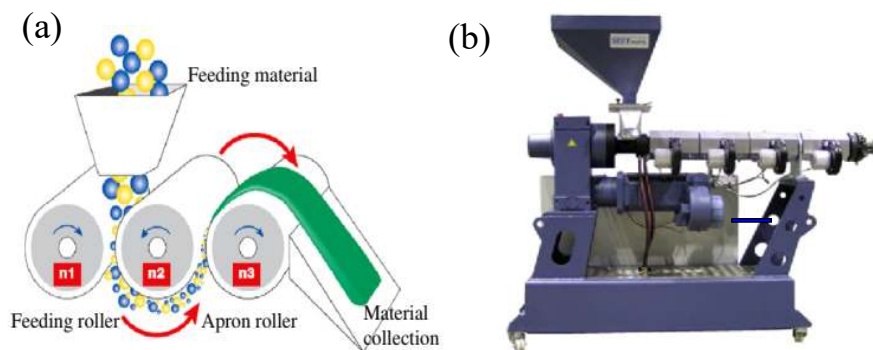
(a) Schematic of calendering machine (b) Extrusion mixer [23]
